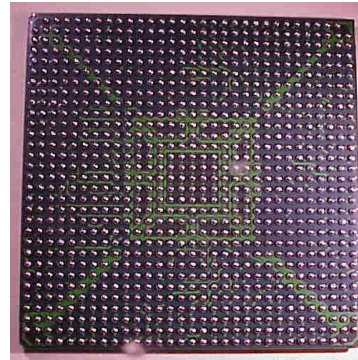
Leakage and corrosion problems with BGA components between balls due to poorly cleaned water soluble solderpaste from ball attachment
